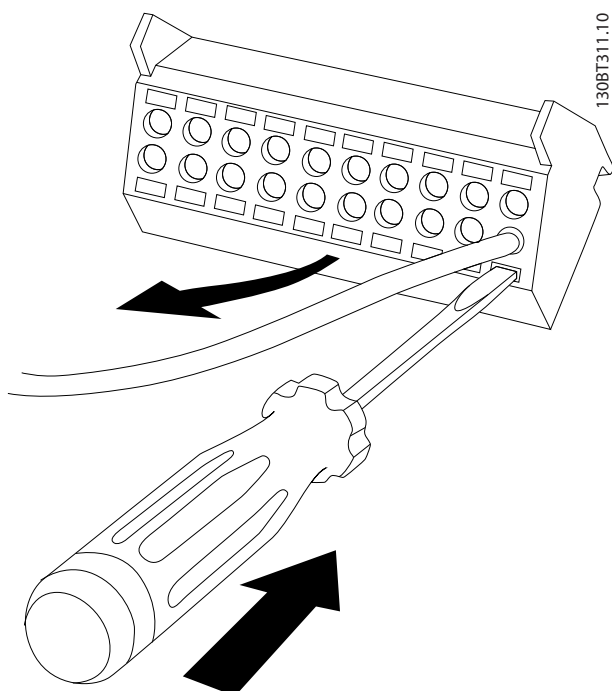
Removing the Screwdriver after Cable Insertion
